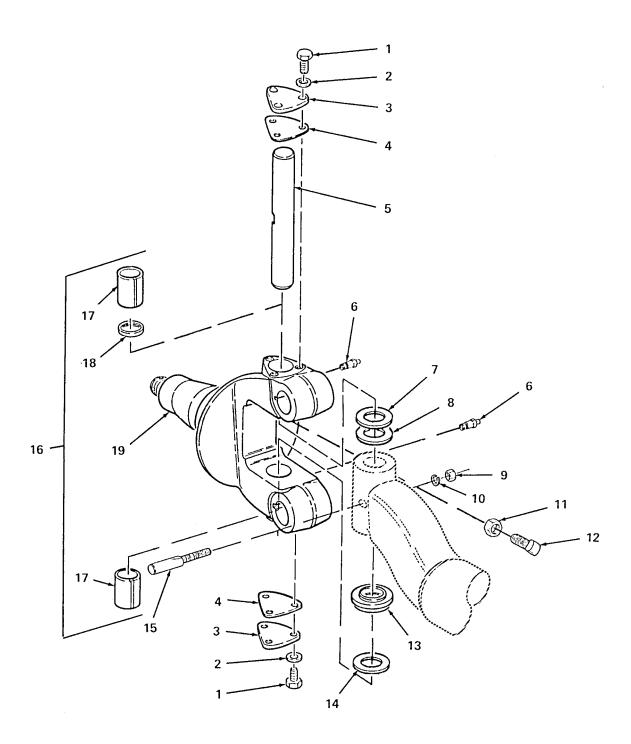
Knuckle and Spindle Assembly (Sheet 1 of 2)
